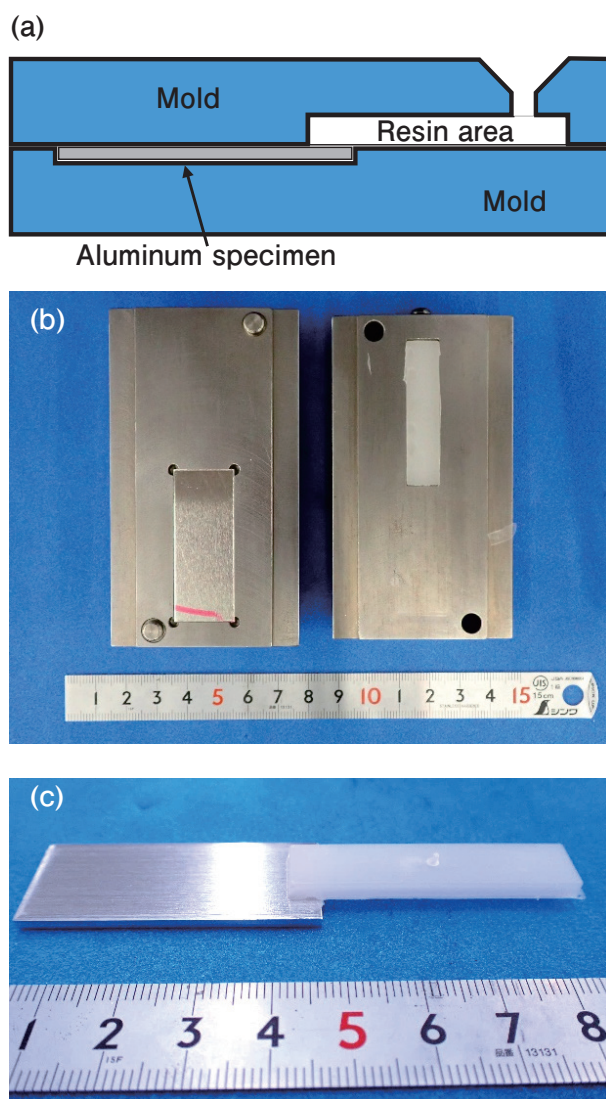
(a) Schematic illustration of mold and aluminum specimen during injection process. Appearance of (b) bare aluminum sheet and injected PP resin in the opened mold after injection and (c) joining sample of the KO treatment sheet and PP resin.
